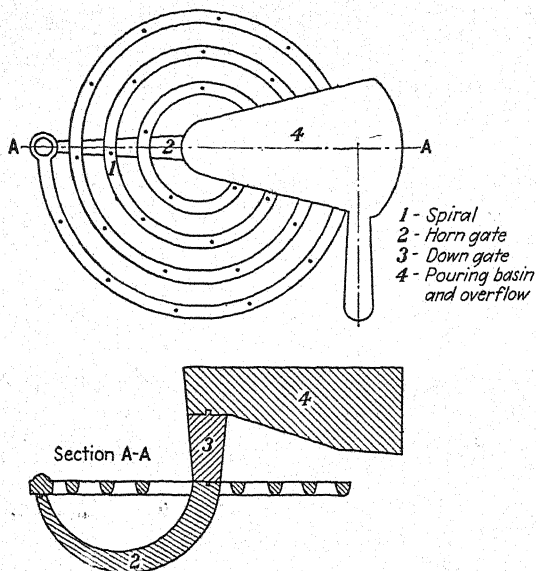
Pattern assembly used for determining fluidity of cast iron. (Saeger and Krynitsky.⁽⁴⁸⁶⁾)
